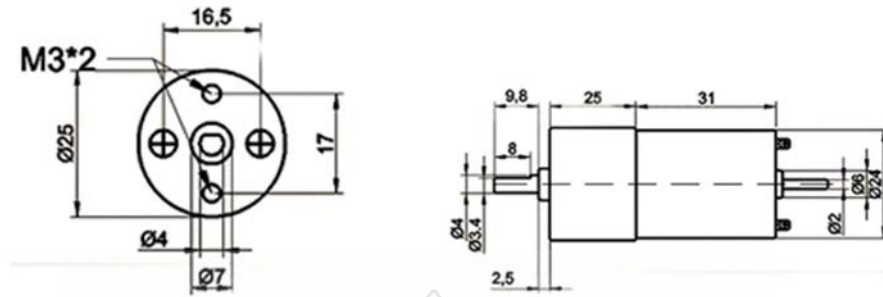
JG25-370 Geared DC motor (a) front view (b) side view
